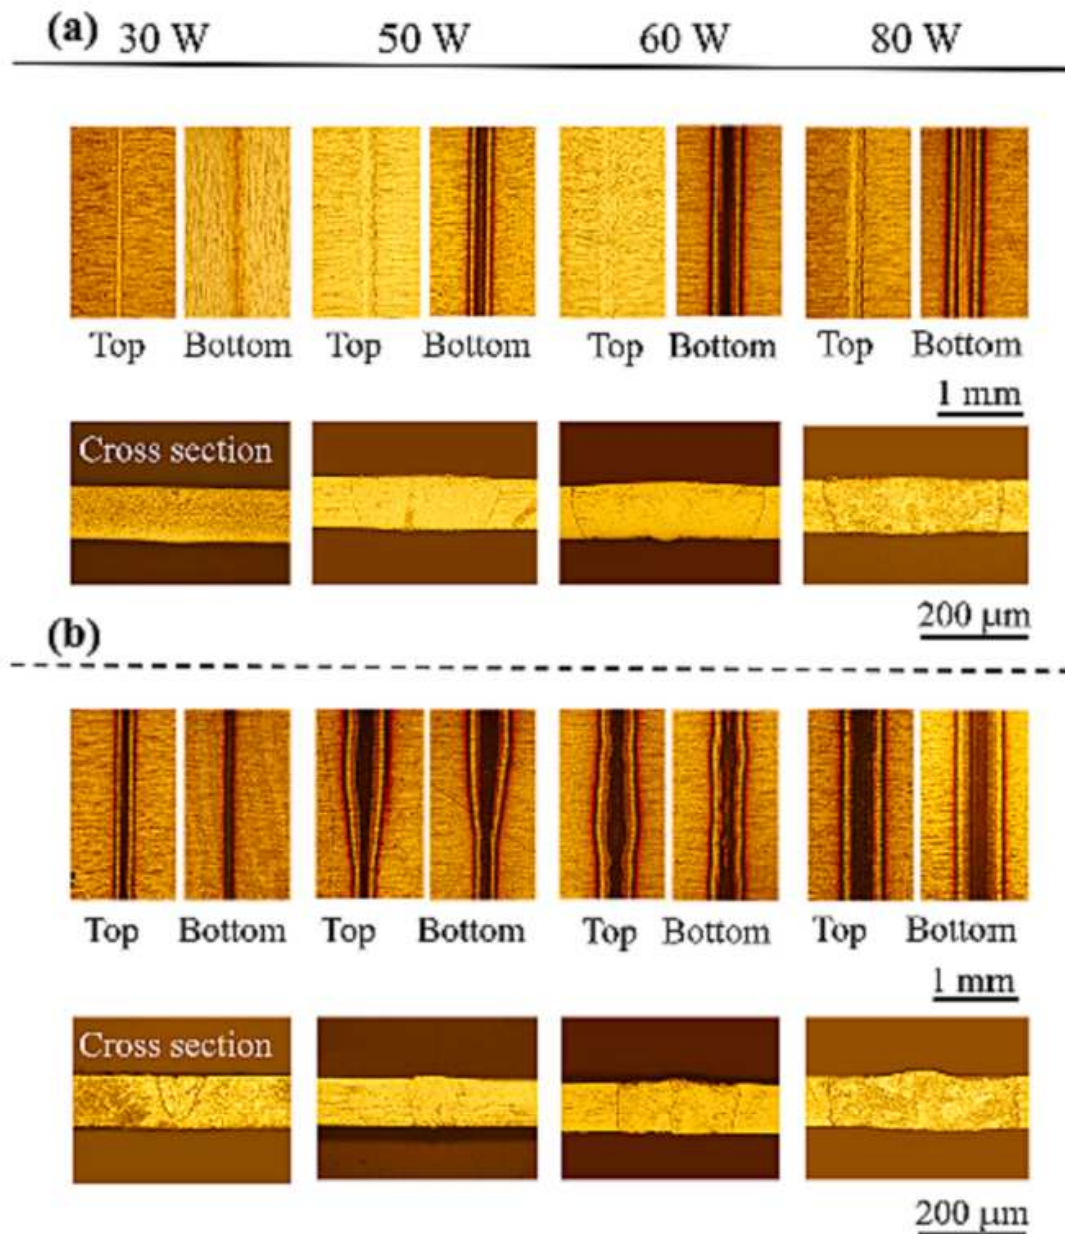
Images of weld surface and cross-section with varying laser powers (a) with shielding gas (b) without shielding gas
